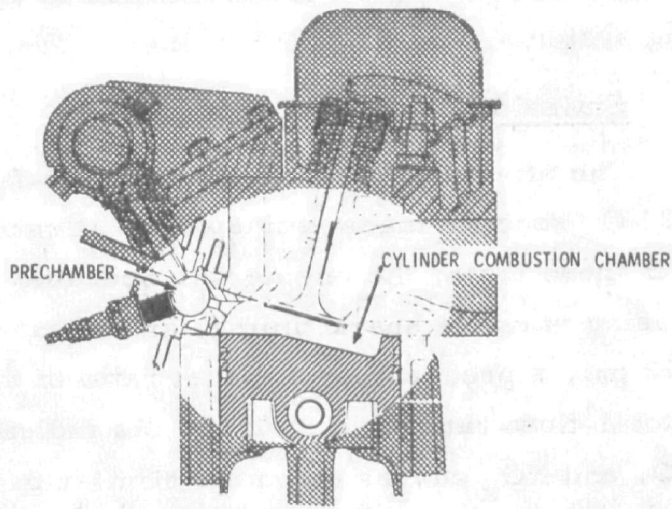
General Motors single-cylinder jet ignition stratified charge engine (Ref. 4-6)
